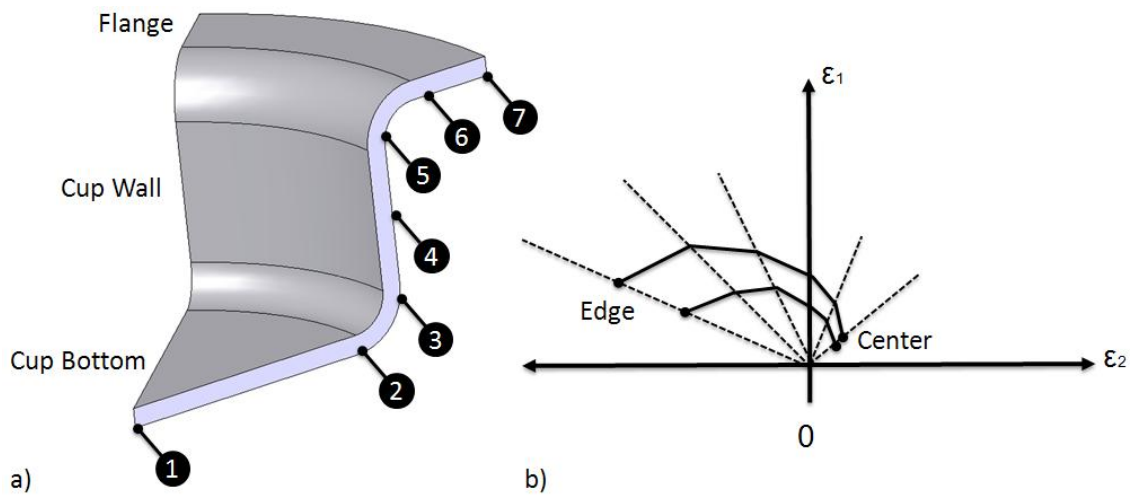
a) Section of a cup showing locations of strain measurements. b) Strain measurements at two stages of the drawing process.
